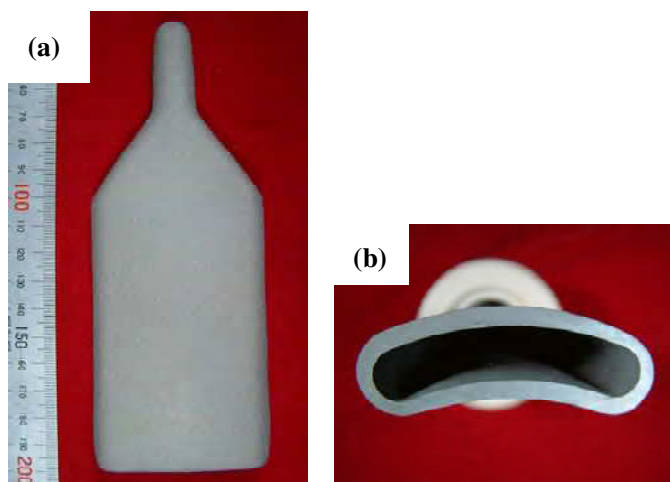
Plasma sprayed crucibles. (a) External appearance of the crucible manufactured by plasma spraying of molybdenum powder on the copper master mold and (b) its cross-sectional diagram.
